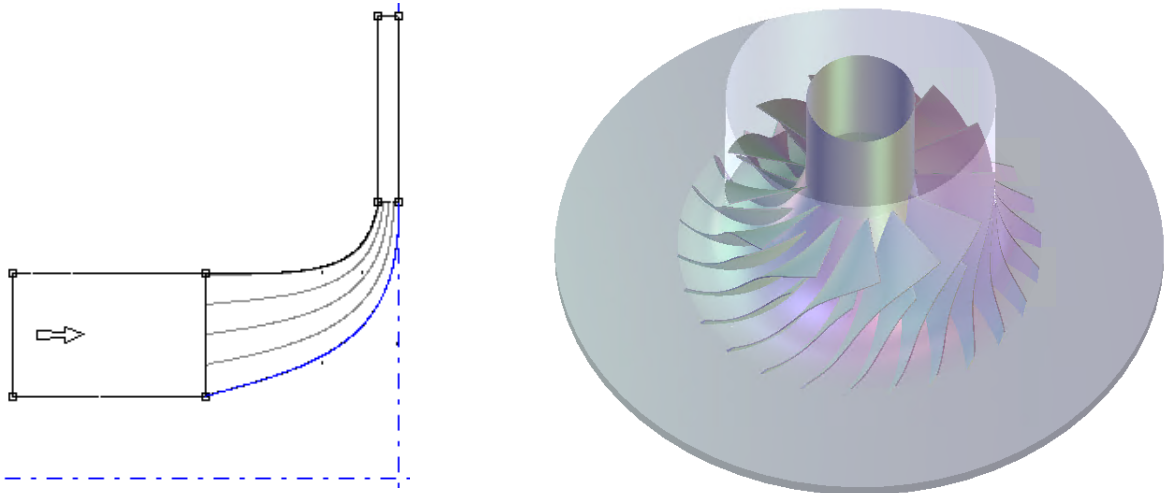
Full 1D meanline design, comprehensive of inlet flow channel, impeller and diffuser (Left), and full 3D impeller rendering (Right) as obtained in BladeGen.
